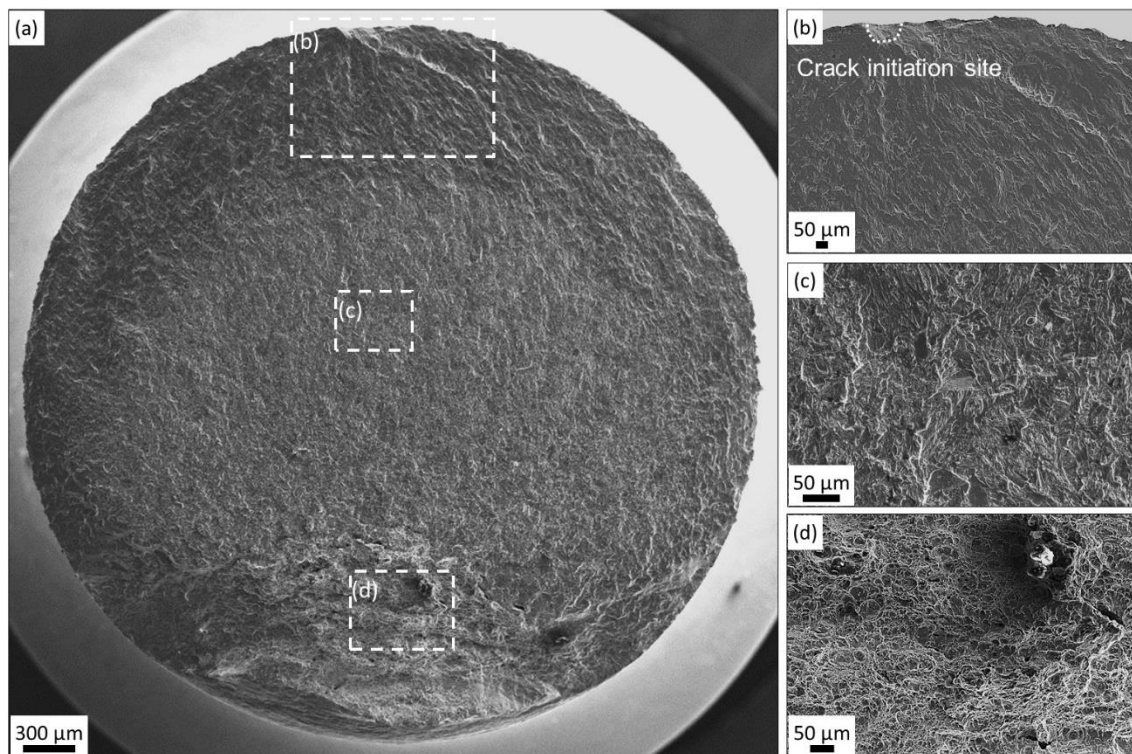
Fracture surface at 450 MPa without brittle fracture phenomenon. (a) Fracture surface. (b) Magnified location near crack initiation. (c) Example of crack propagation area. (d) Final fracture area with a dimple feature.
